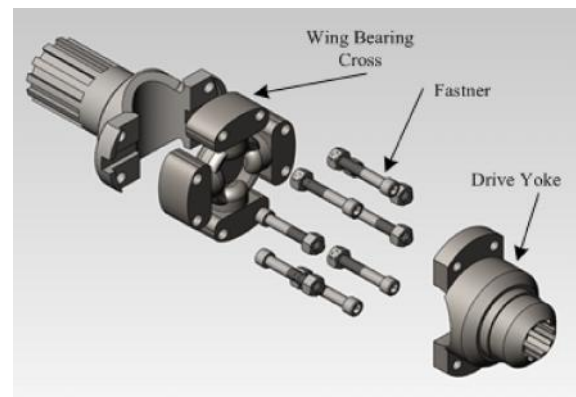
B: Dissected View of "Wing-Bearing Type" Cardan Joint
